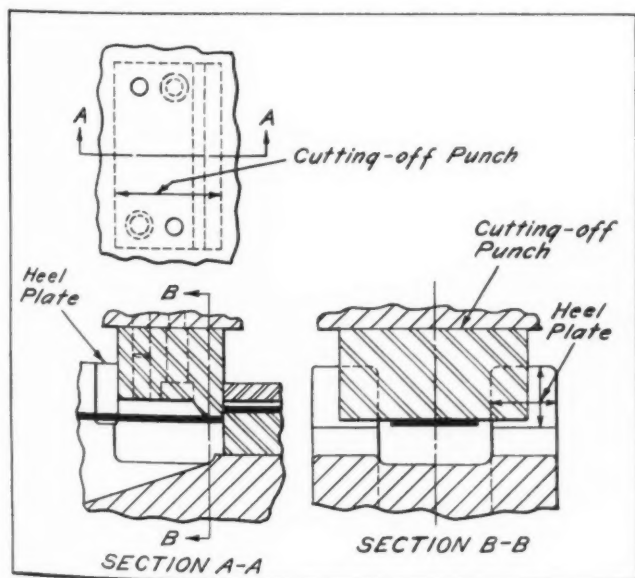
Cutting-off Punch and Supporting Heel Plate
